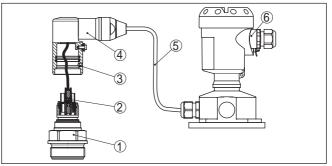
CPT-2x in IP 68 version, 25 bar and lateral cable outlet, external housing
